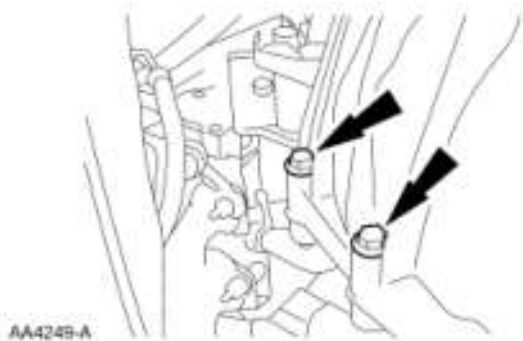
Locating Torque Converter-To-Flexplate Nuts
